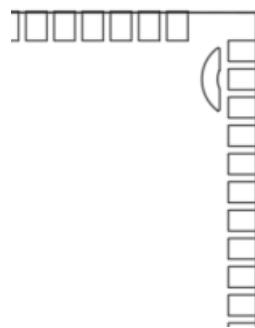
QM623 Bottom Section View / QM623 底部部分视图
